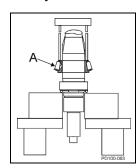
Press Lower Cone and Roller Assembly onto Shaft
